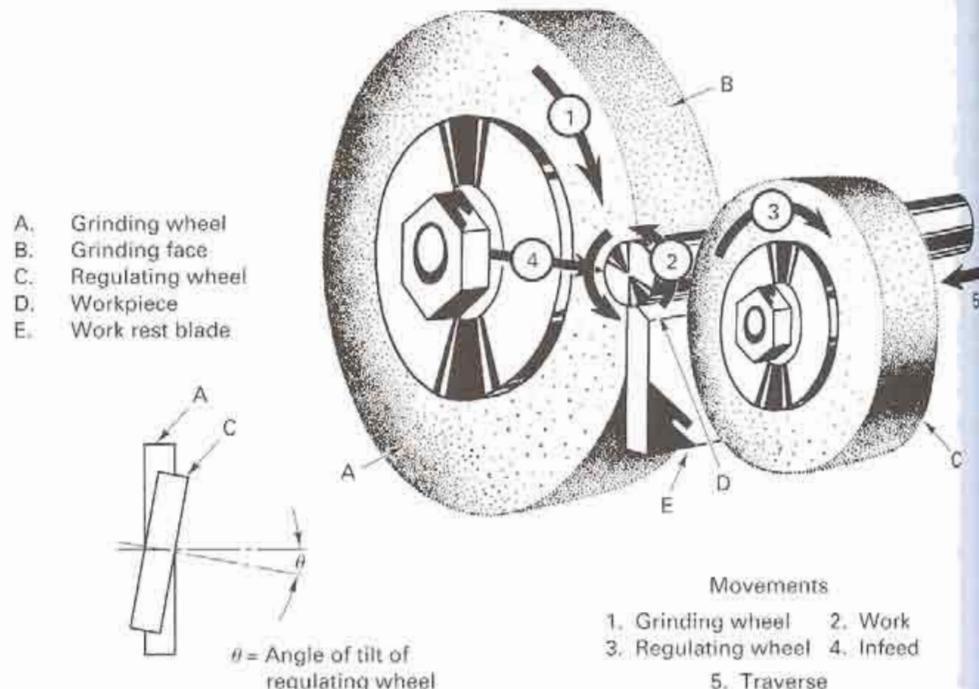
Centerless grinding showing the relationship among the grinding wheel, the regulating wheel, and the workpiece in centerless method. (Courtesy of Carborundum Company.)
